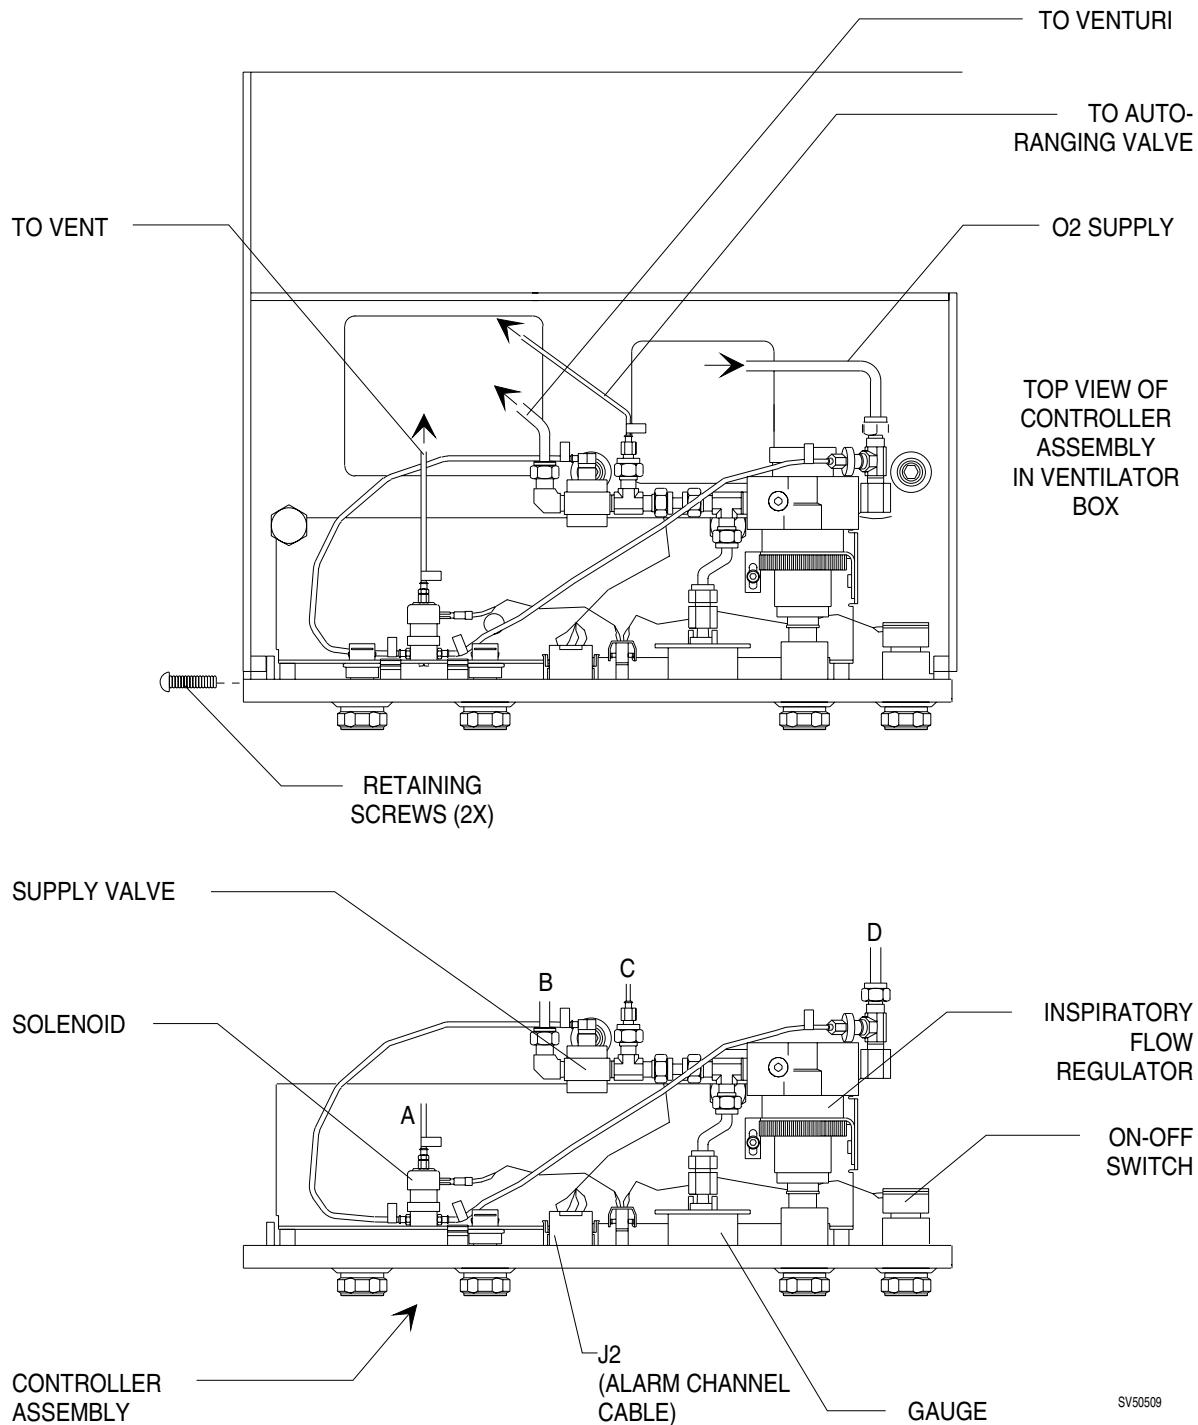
AV-2 VENTILATOR CONTROLLER ASSEMBLY
